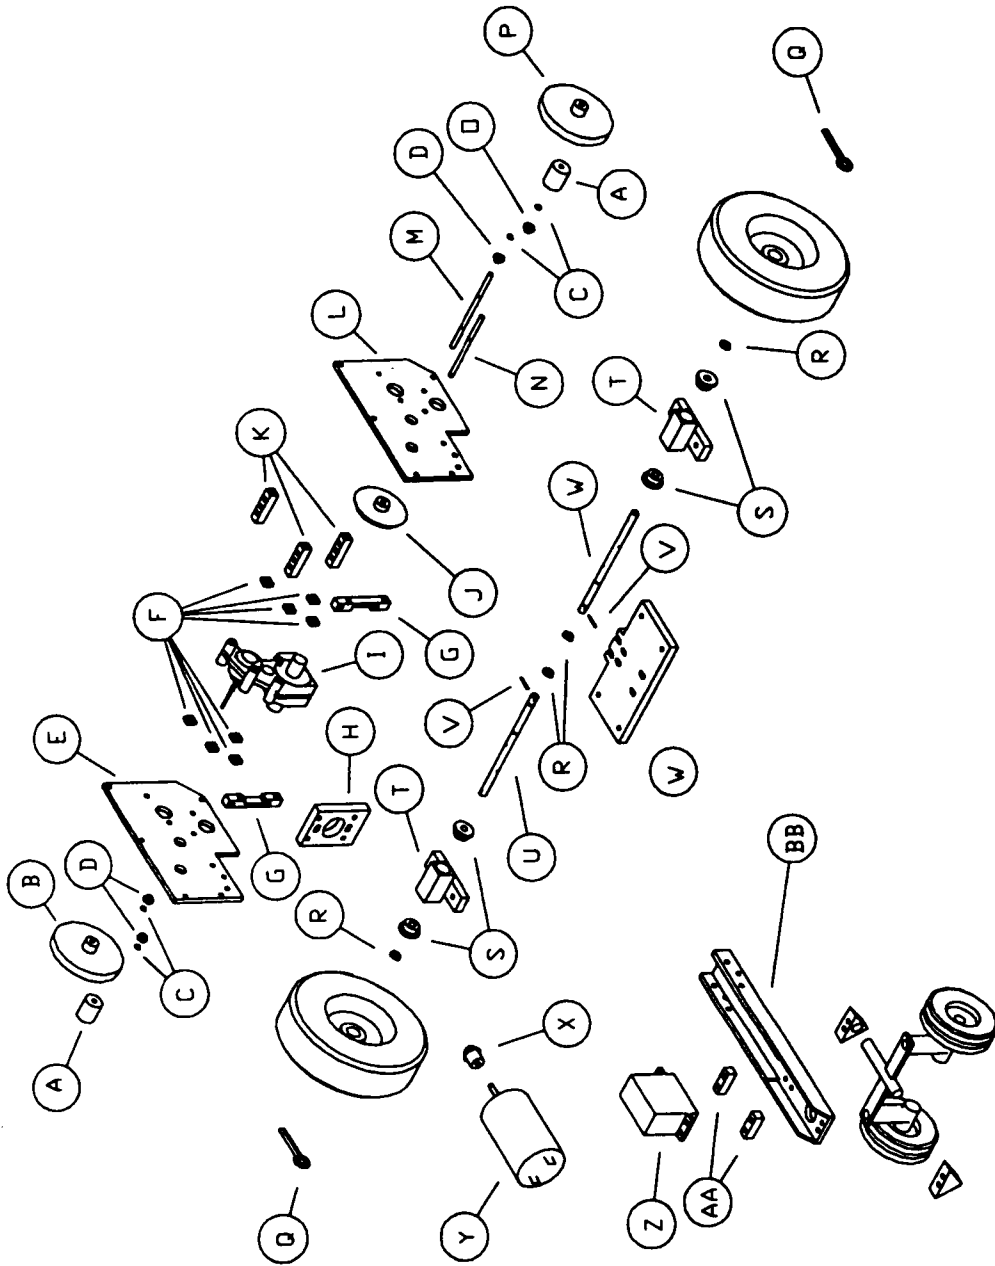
Exploded view of RC tractor. Parts listing in Table 1.
